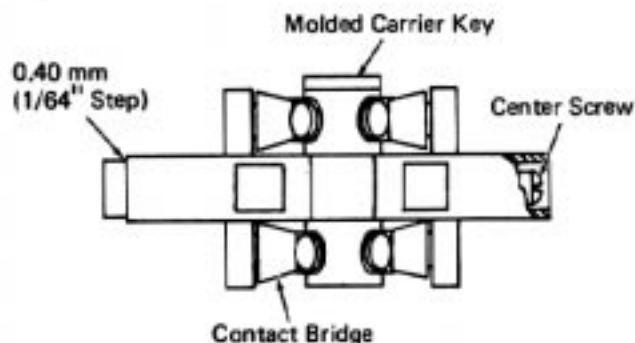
Auxiliary Interlock Contact Carrier Assembly
